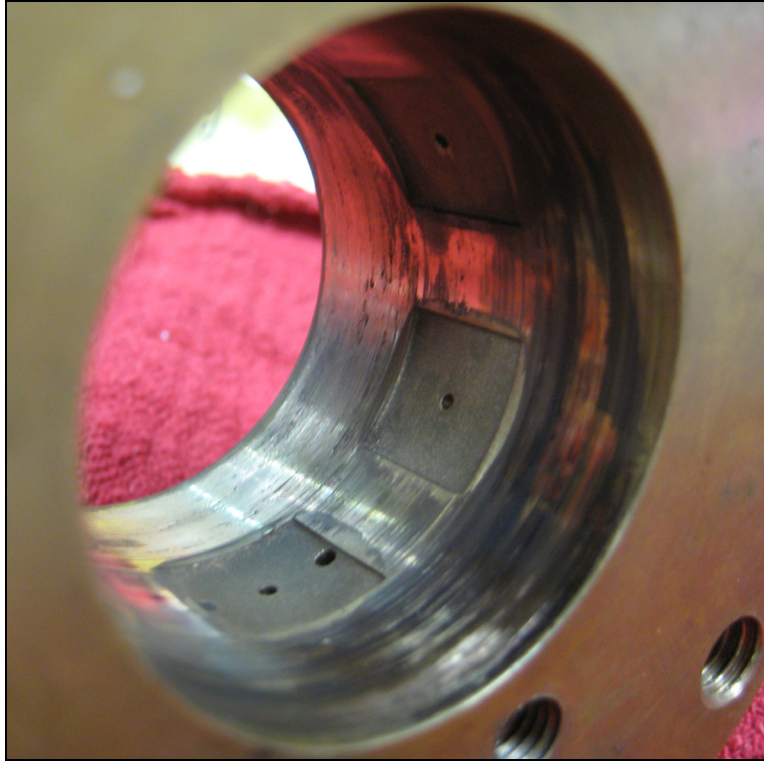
Burnishing of the bearing in the direction of applied unit load after start-transient testing
